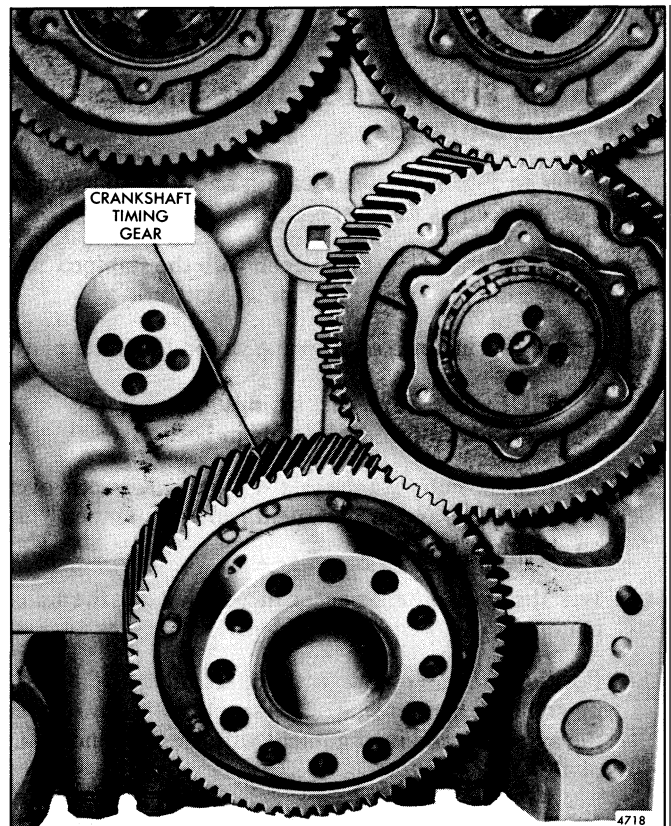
Rear Crankshaft Timing Gear Mounting
